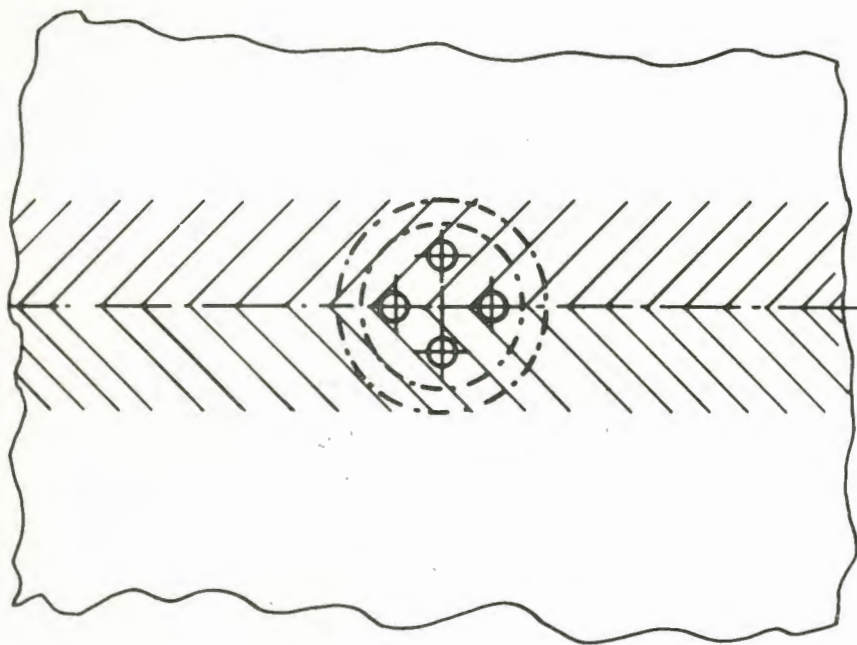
Gage holes in weld metal for residual stress measurements.
